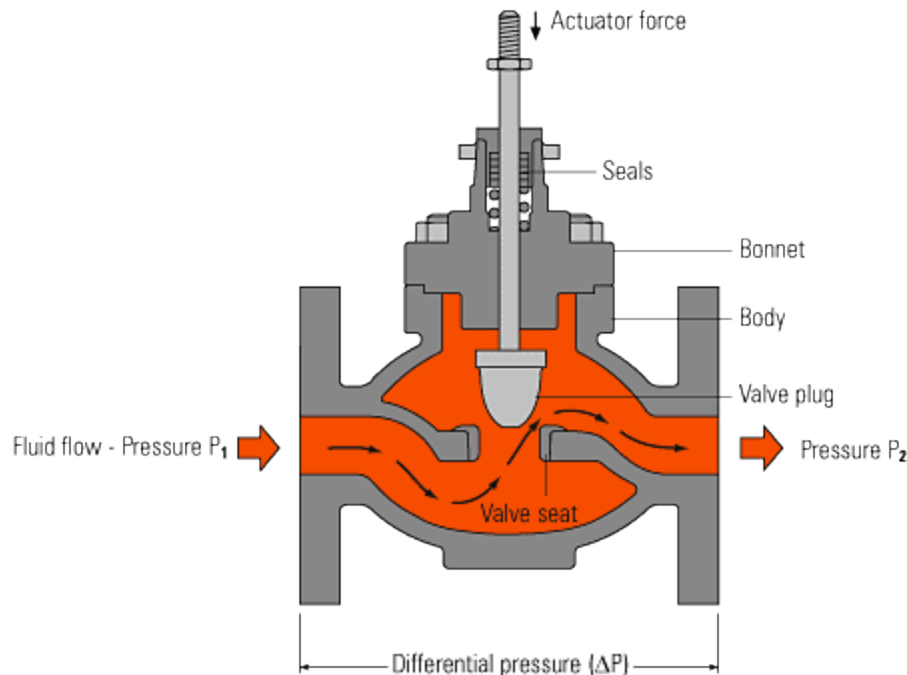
Flow through a single seat, two-port globe valve
